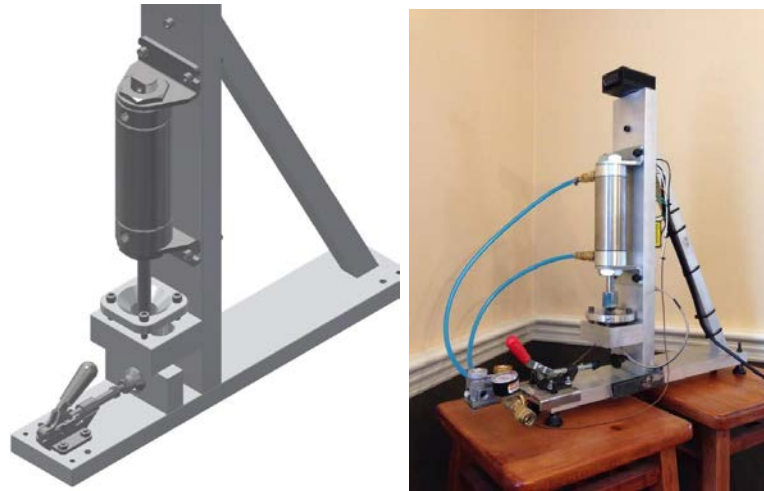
Final Prototype Design using SolidWorks CAD software (left). Finalized prototype assembly (right)
